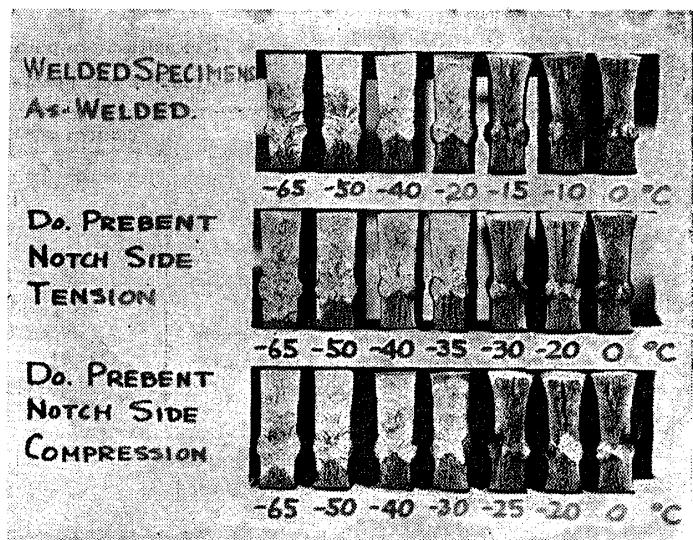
Fracture appearance of specimens tested (4)~(6)
